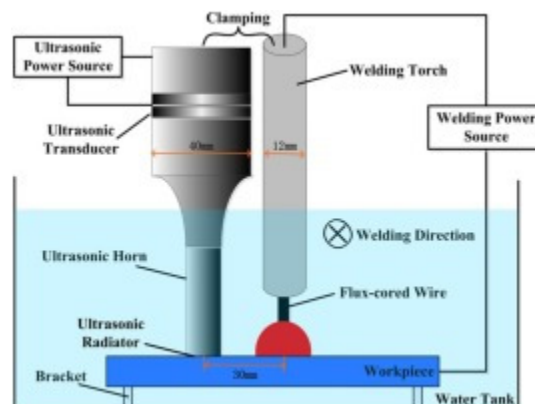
Representing the Wet Under water welding [Science Direct].
